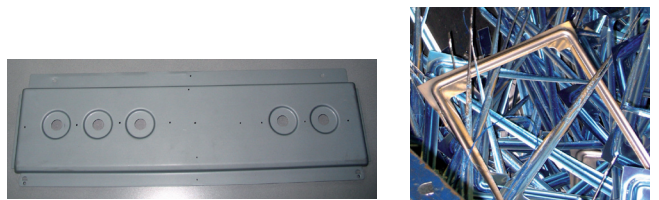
Appearance of front plate after trimming of flat bar and flat bar trimming scrap
